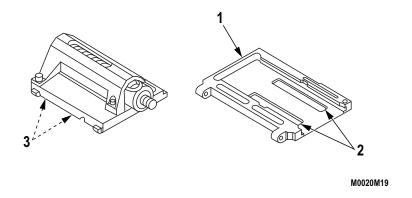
Feed Slide Assembly and Feed Tray Inspection.
